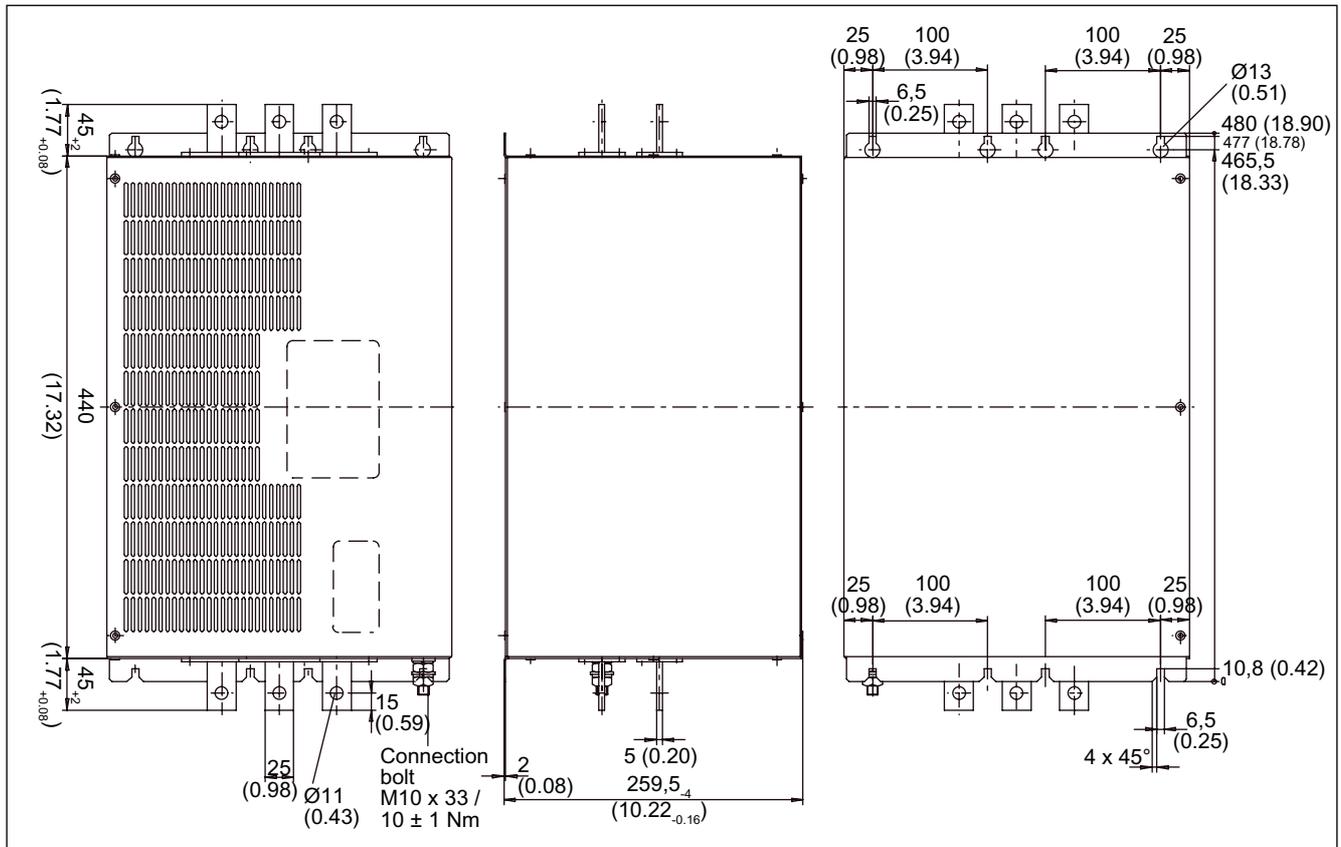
Dimension drawing of Wideband Line Filter 120 kW for Active Lines Modules, all dimensions in mm and (inches)
